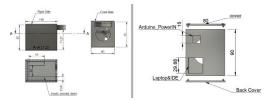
Base Design of Robotic Arm Components (all dimensions in mm)
